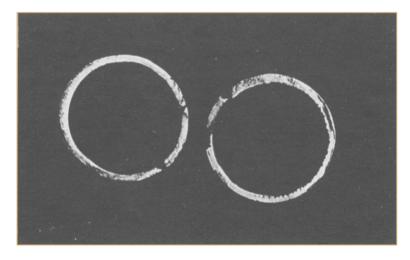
The two rupture faces are damaged by impacts, which prevents any metallurgical examination. The macroscopical aspect of the rupture suggests a rupture under a fatigue mechanism [Mousset, 1990].
